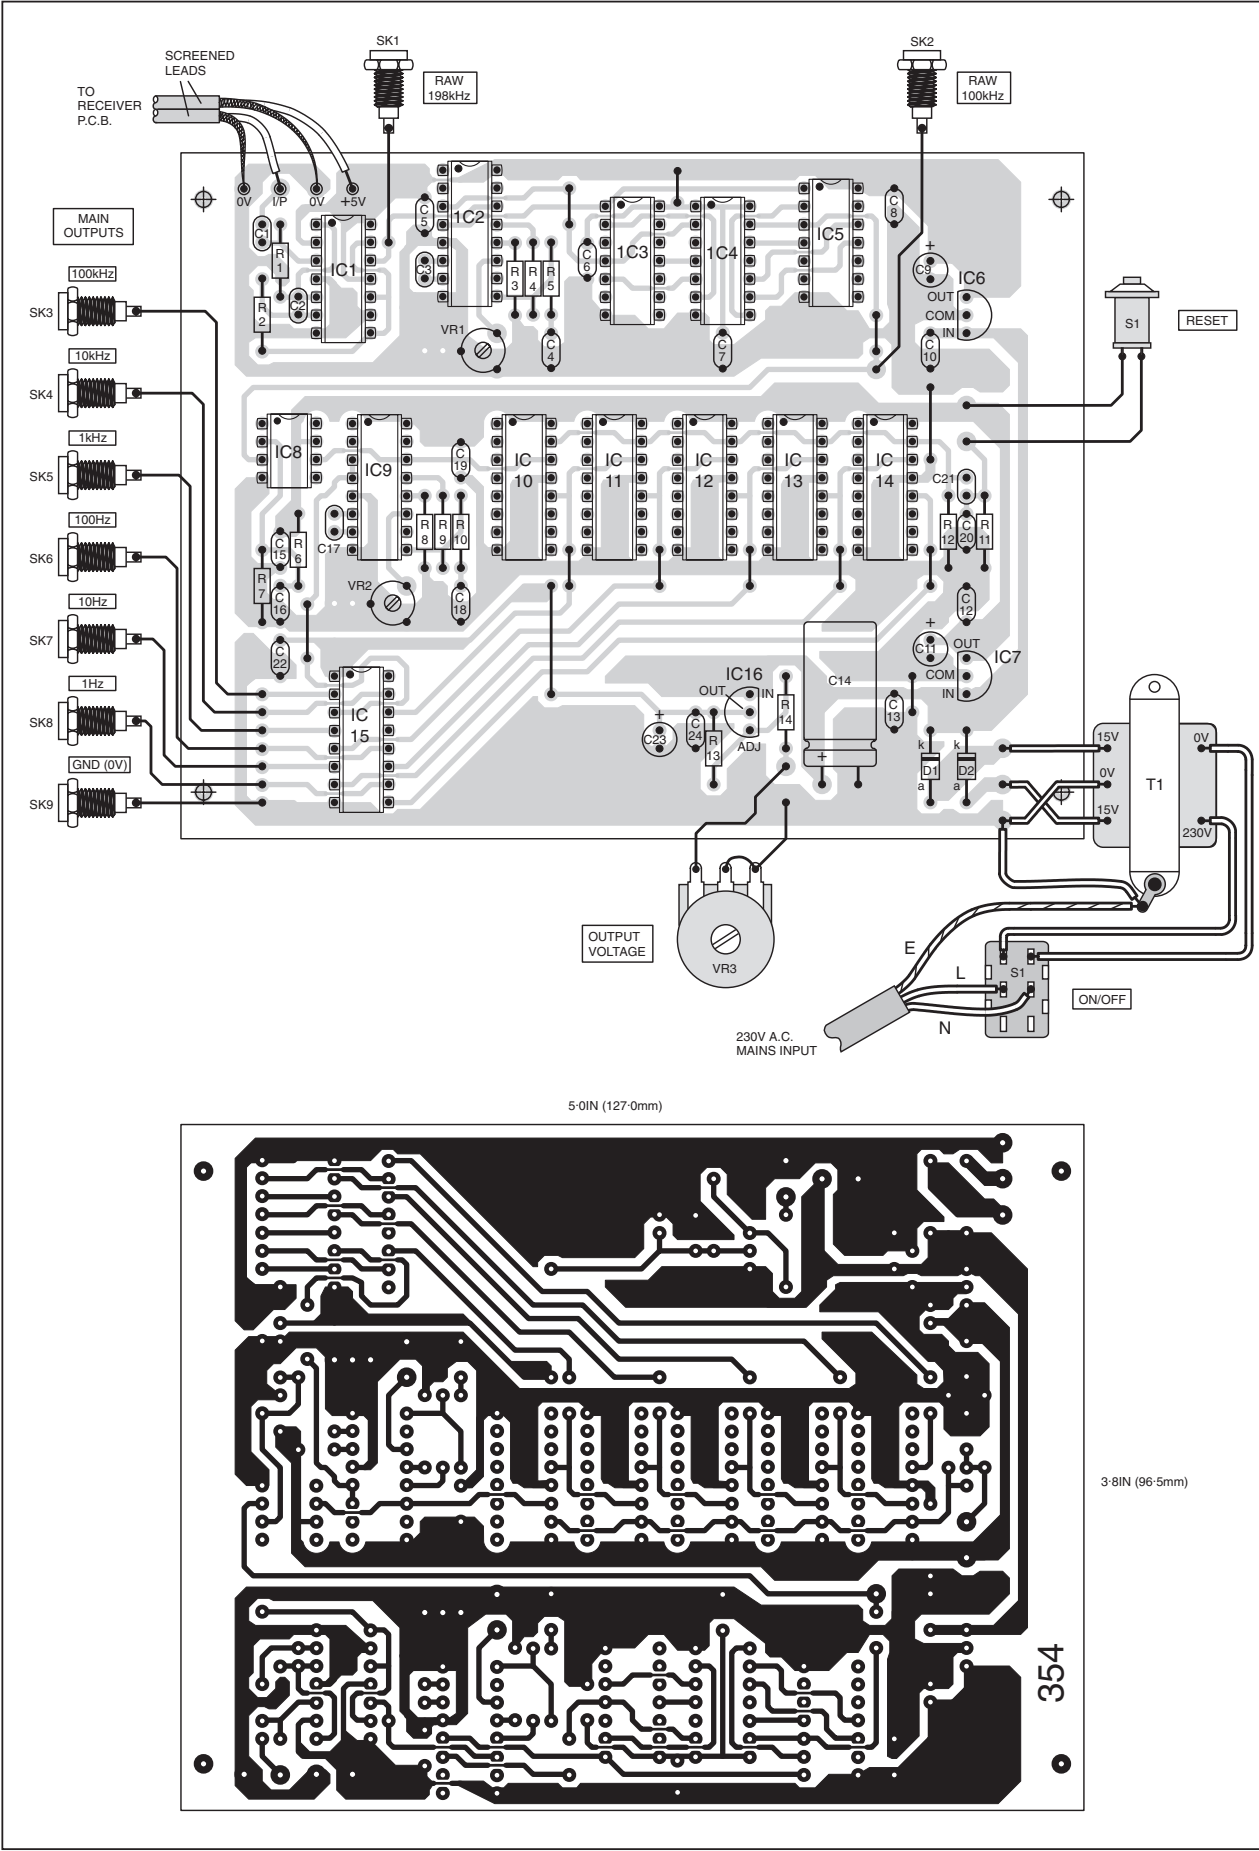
Printed circuit board component layout, wiring and full-size master for the Digital board.
